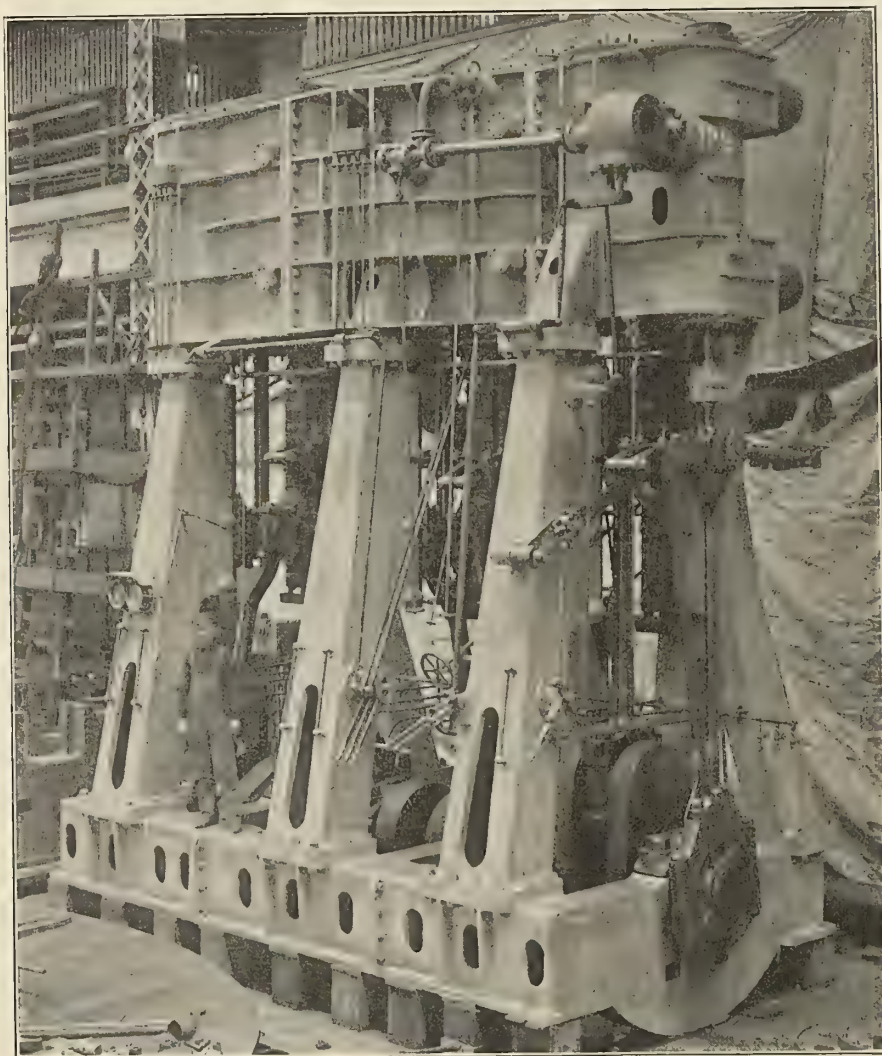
THE CHANSLOR IS PROPELLED BY ONE THREE-CYLINDER, TRIPLE-EXPANSION ENGINE.
